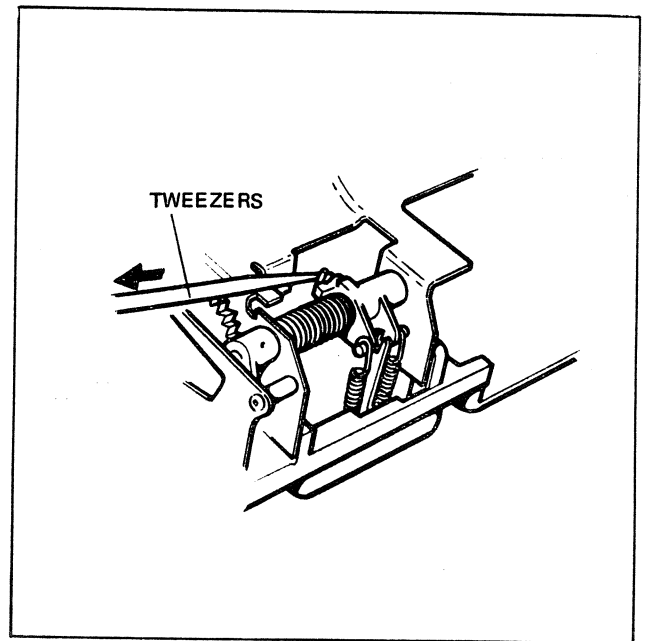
REMOVING FRESNEL CARRIER DRIVE SPRING
